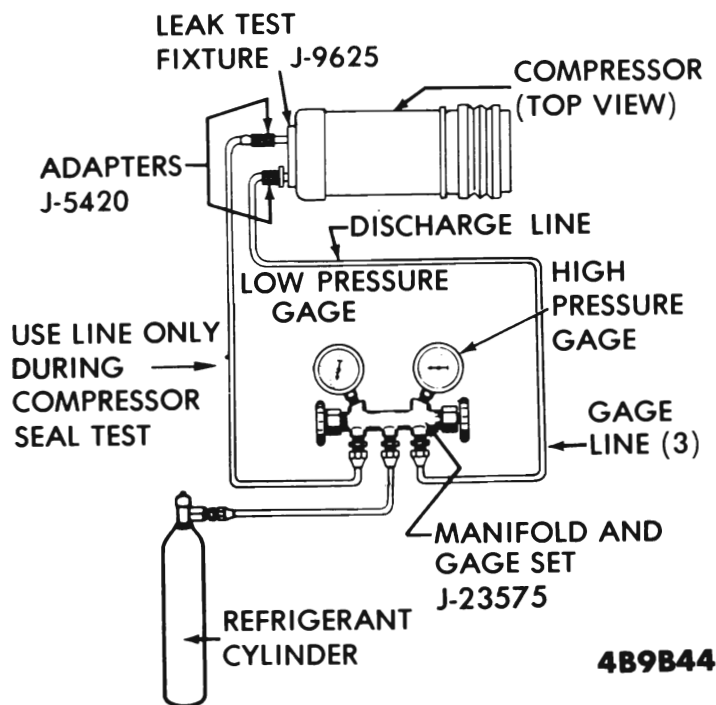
B-51 Leak Testing Shaft Seal and Seal Seat O Ring
